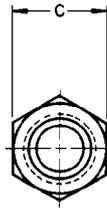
FLARE NUTS AND REDUCING FLARE NUTS
